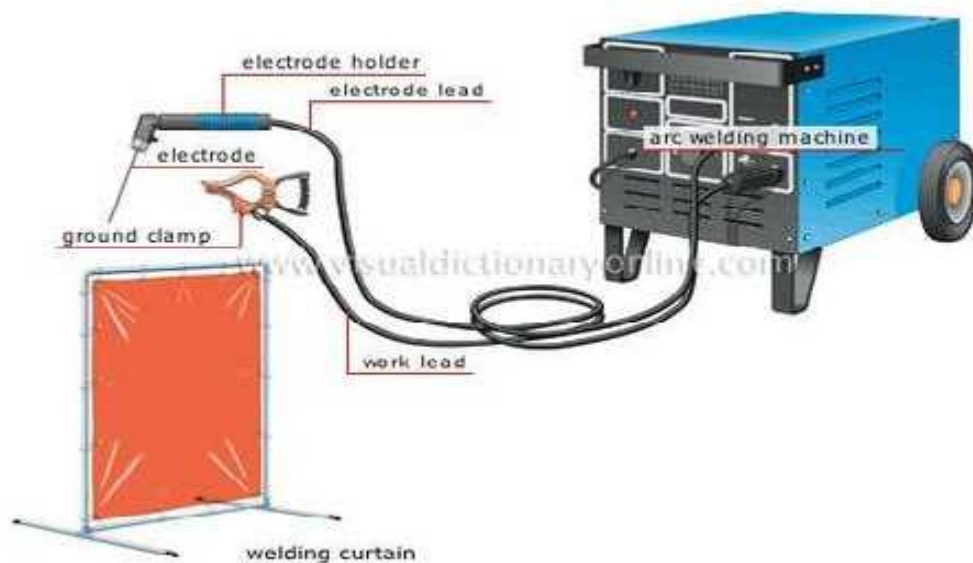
The overall view of manual arc welding equipment and tools
